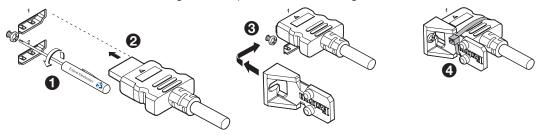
LockIt Cable Lacing Bracket Mounting Instructions
